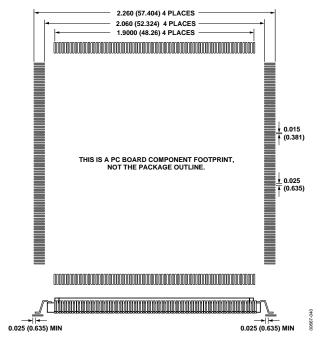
PC Board Component Footprint Dimensions shown in inches and (millimeters)
